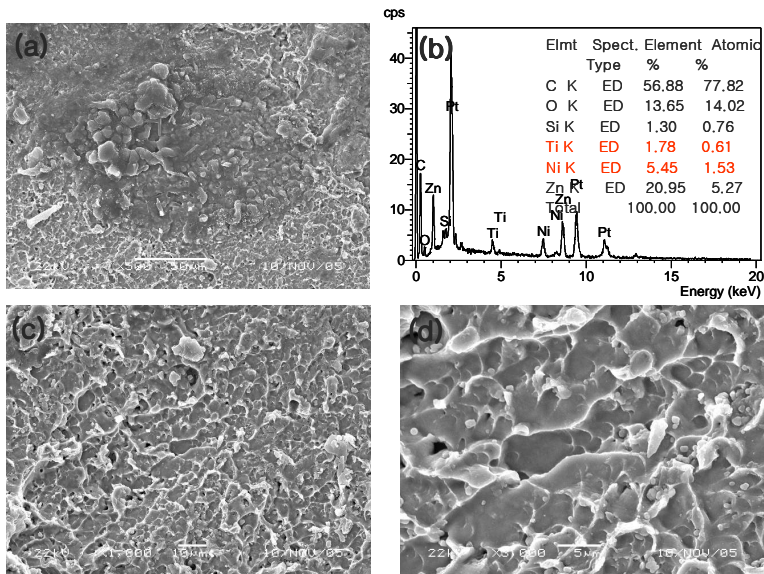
SEM and EDS showing the fractured surface morphology of Ni-Ti file fractured at the middle part after clinical use. (a), (c), (d) fractured surface (X 200, 1000, 3000), (b) EDS peaks
